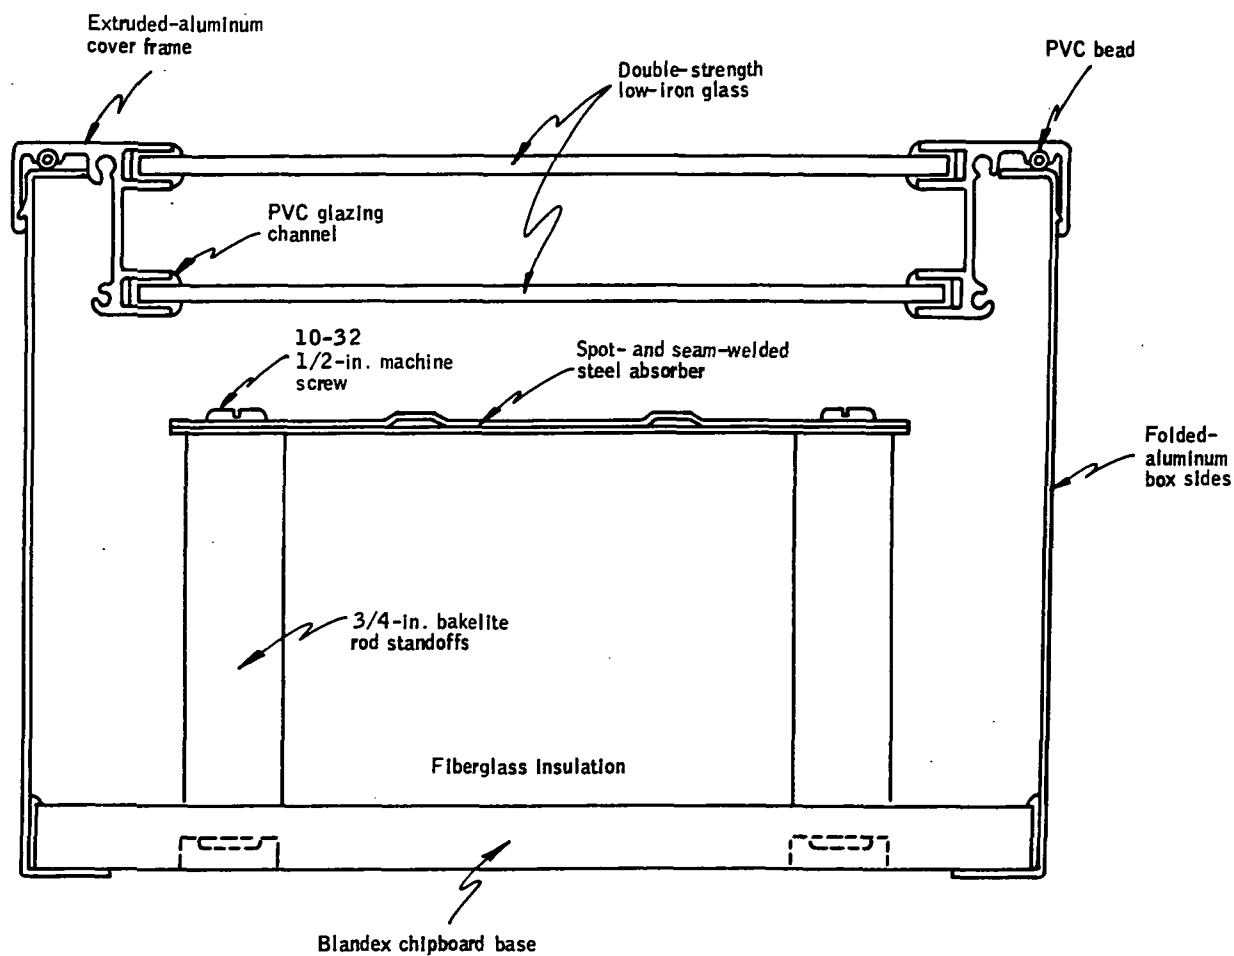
Design II. - Folded Aluminum Box Sides with Extruded Aluminum Cover Frame and Chipboard Bottom
